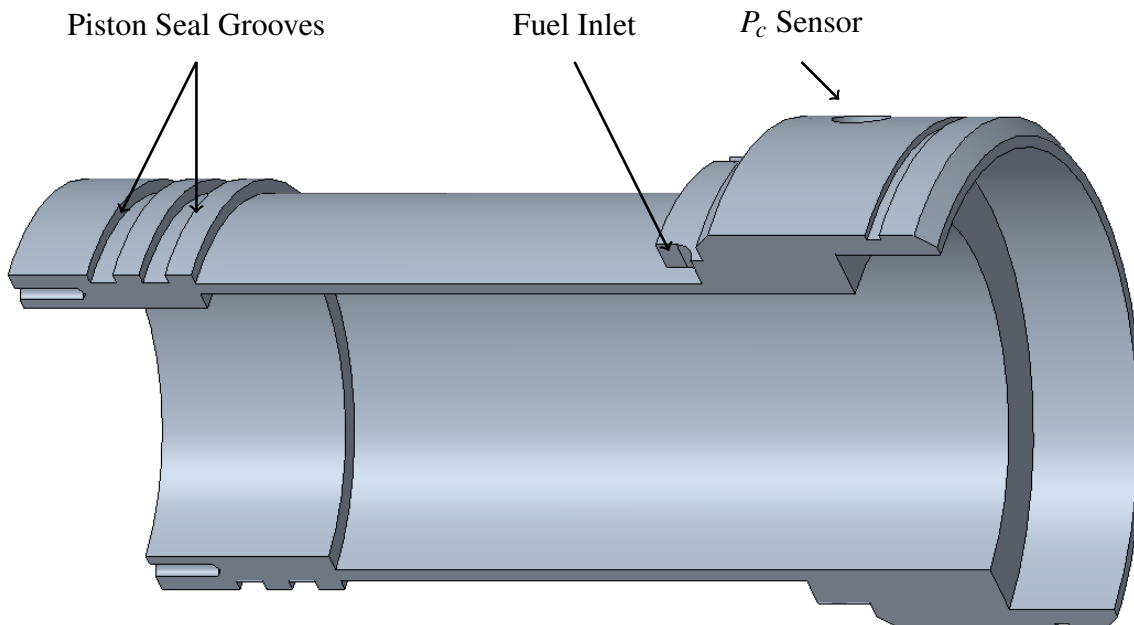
Ouroboros-1 combustion chamber cross-section view.
